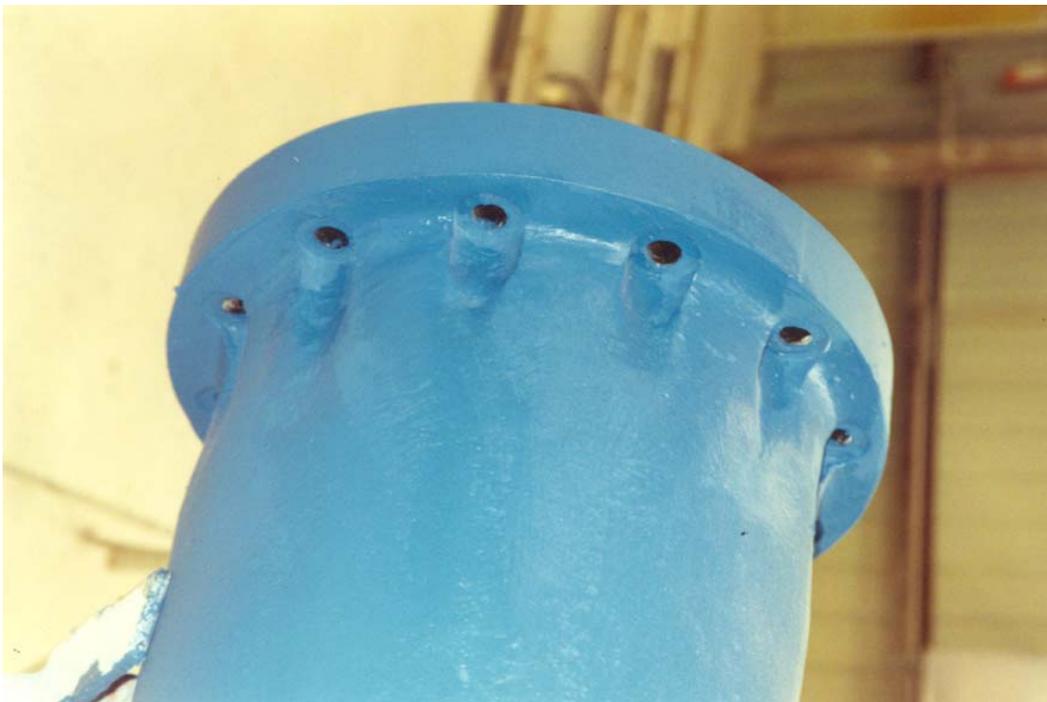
Lifting collar on 8in. (203mm) FIBERBOND(R) column pipe section.
